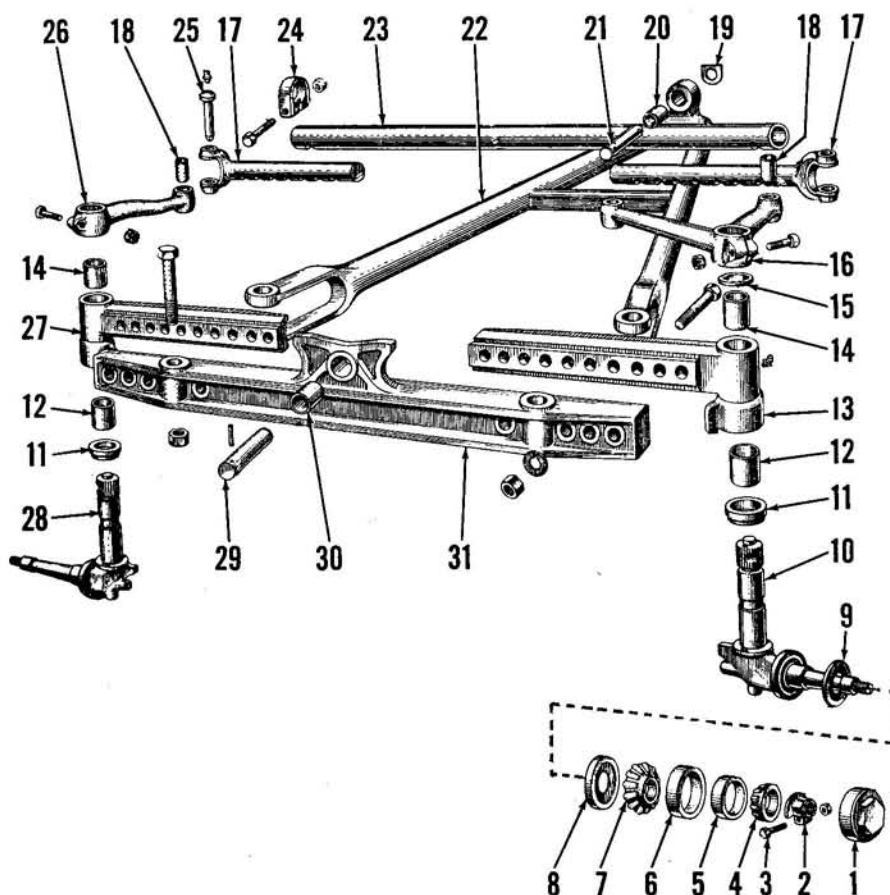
Exploded view of adjustable front axle, radius rod, tie rod and steering arms for models "FSM" and "New FSM". Front axle assembly for earlier models "FMD" and "FPM" is similar except thrust washers are used on trunnion (29) at each side of axle center member (31) and thrust washer (19) is not used on radius rod pivot pin (21).
